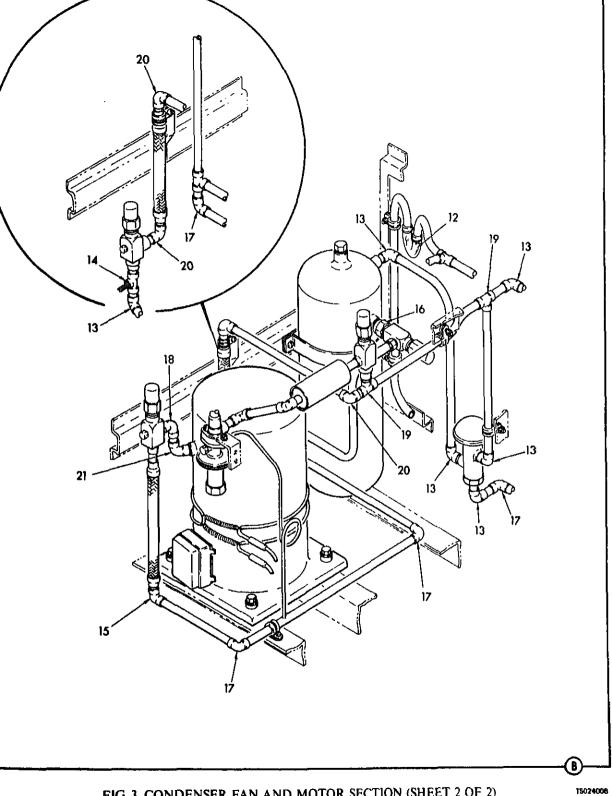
CONDENSER FAN AND MOTOR SECTION (SHEET 2 OF 2)
